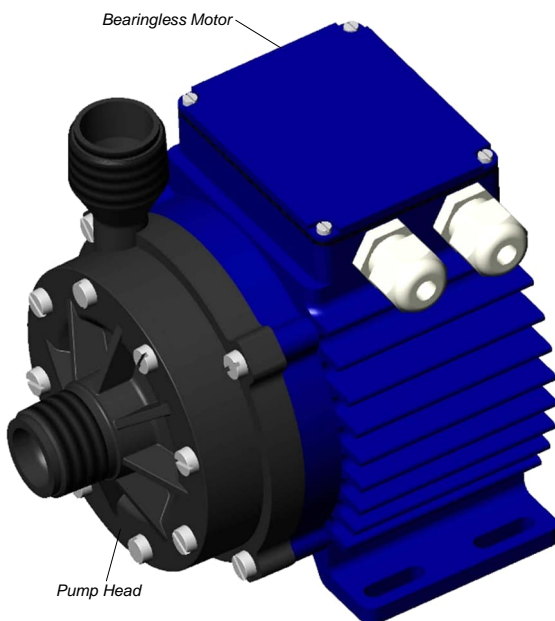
Bearingless motor with pump head LPP-600.5 (PP)
